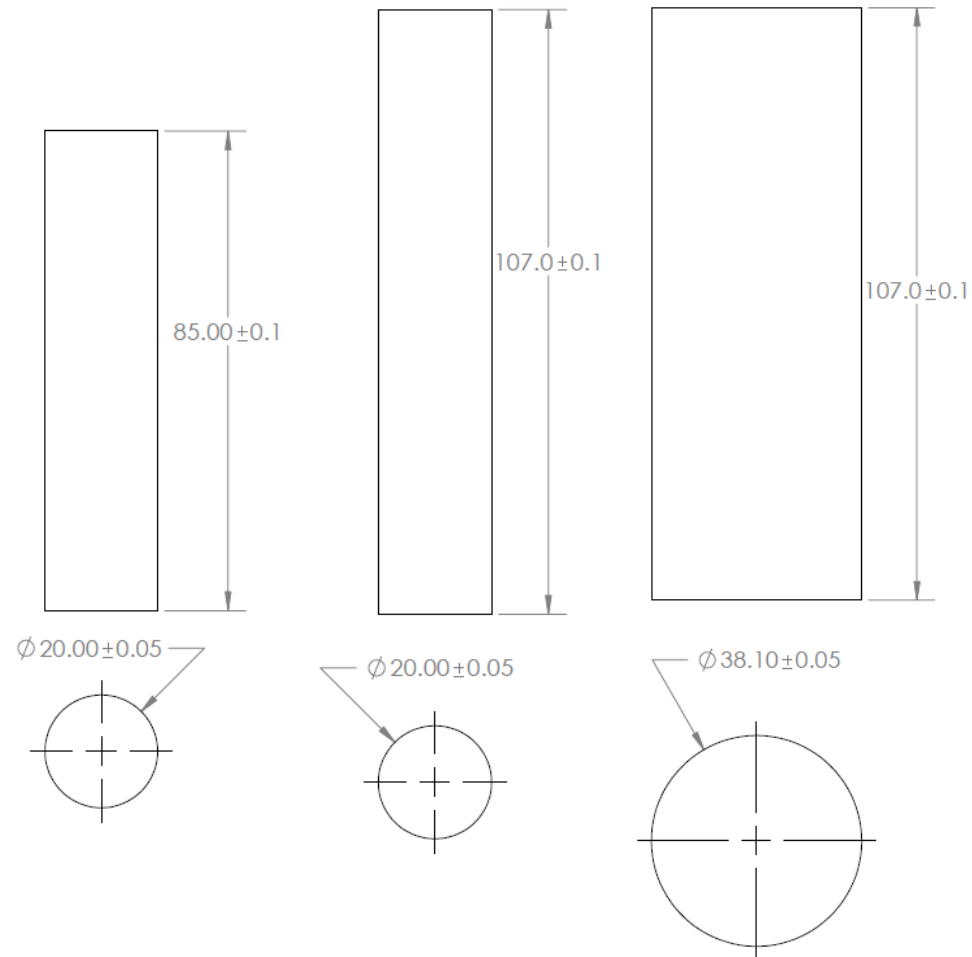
Shaft dimensions for scenario with torque transducer Magtrol 308/311 and without the torque transducer
